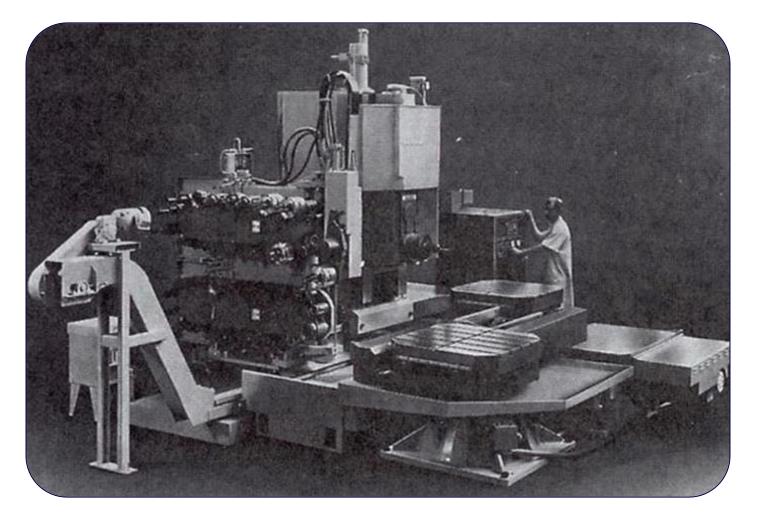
A pivot insertion tool changer on a horizontal machining center using twin matrix tool storage magazines (Photo Cincinnati Machine)
